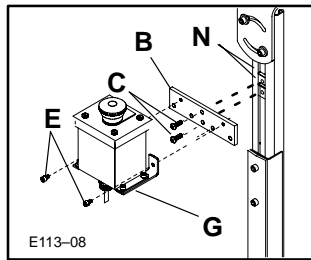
E-Stop Horizontal Mounting to Aluminum Stand Leg
